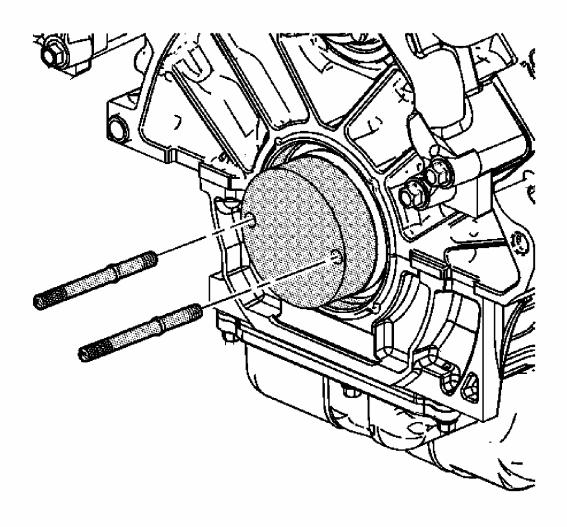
Identifying Pilot Base Retainer Bolts Courtesy of GENERAL MOTORS CORP.
